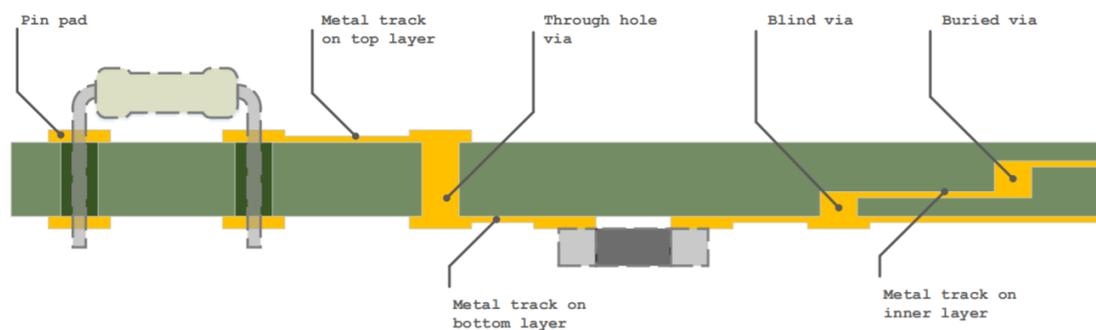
PCB cross-section (Source: Automatic Generation of In-Circuit Tests on Prodrive's AET System for Board Assembly Defects (2017), page 3)
